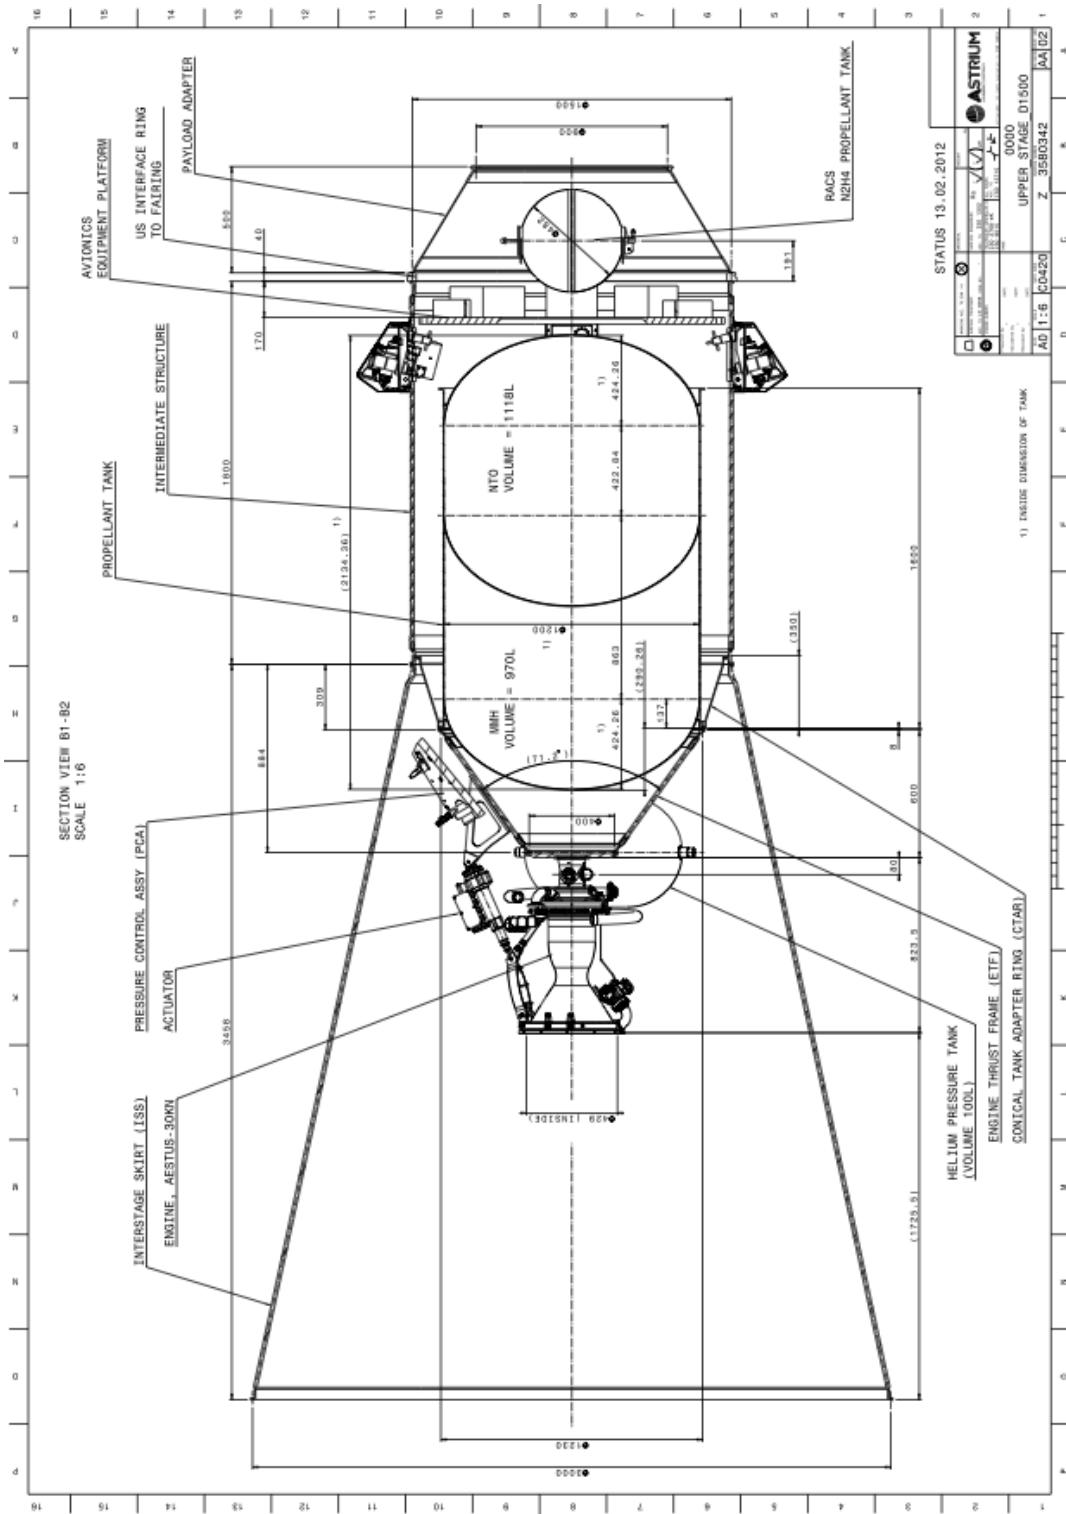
Upper stage technical drawing 2, 2-stage launcher
